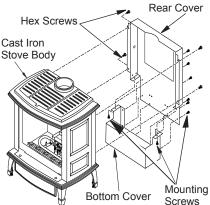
Attaching Rear Cover and Bottom Cover from Stove Body
